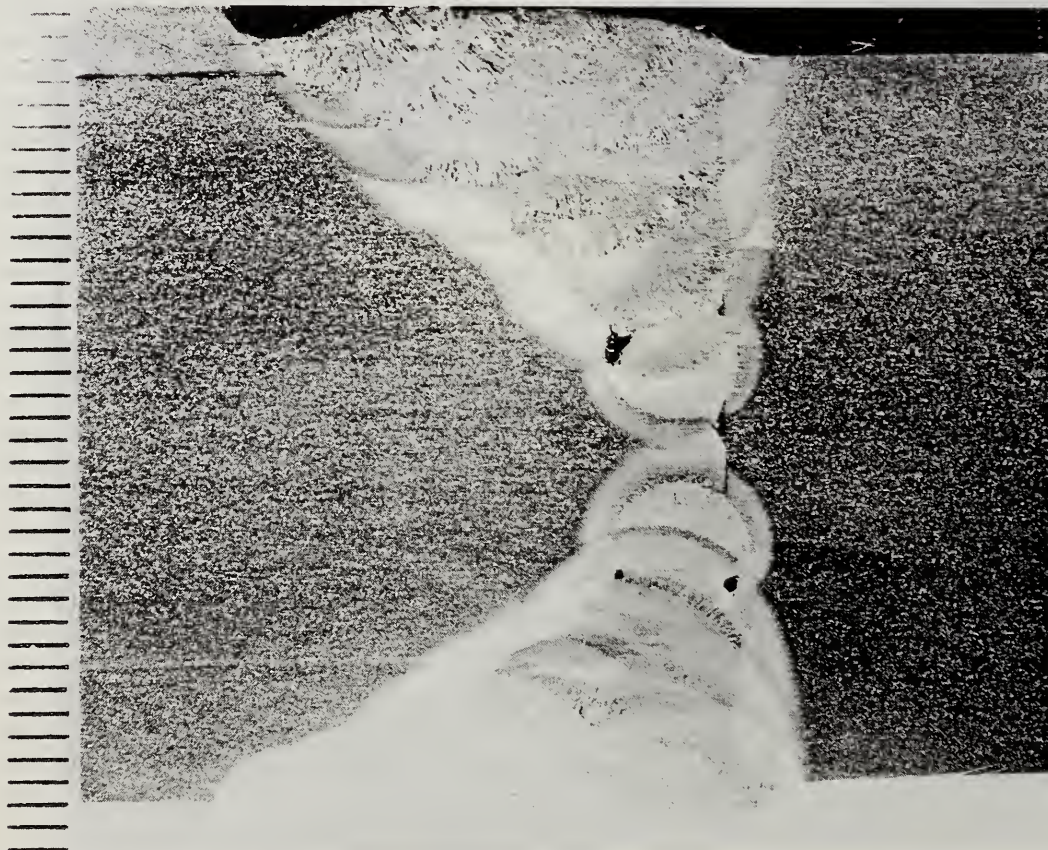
Cross section showing the weld in specimen NBS 6-F1 (x 4)
